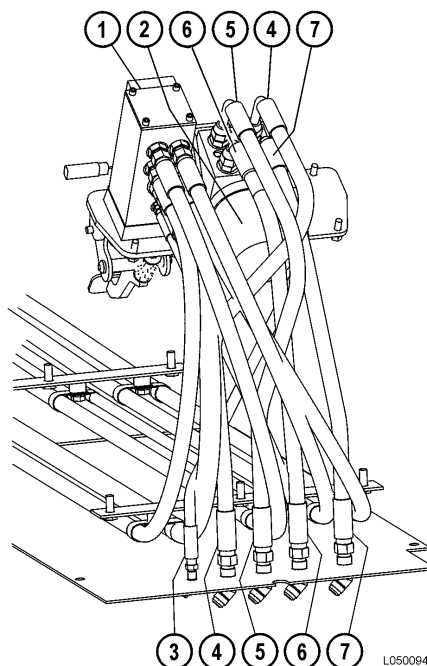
STEERING CONTROL UNIT HOSES
